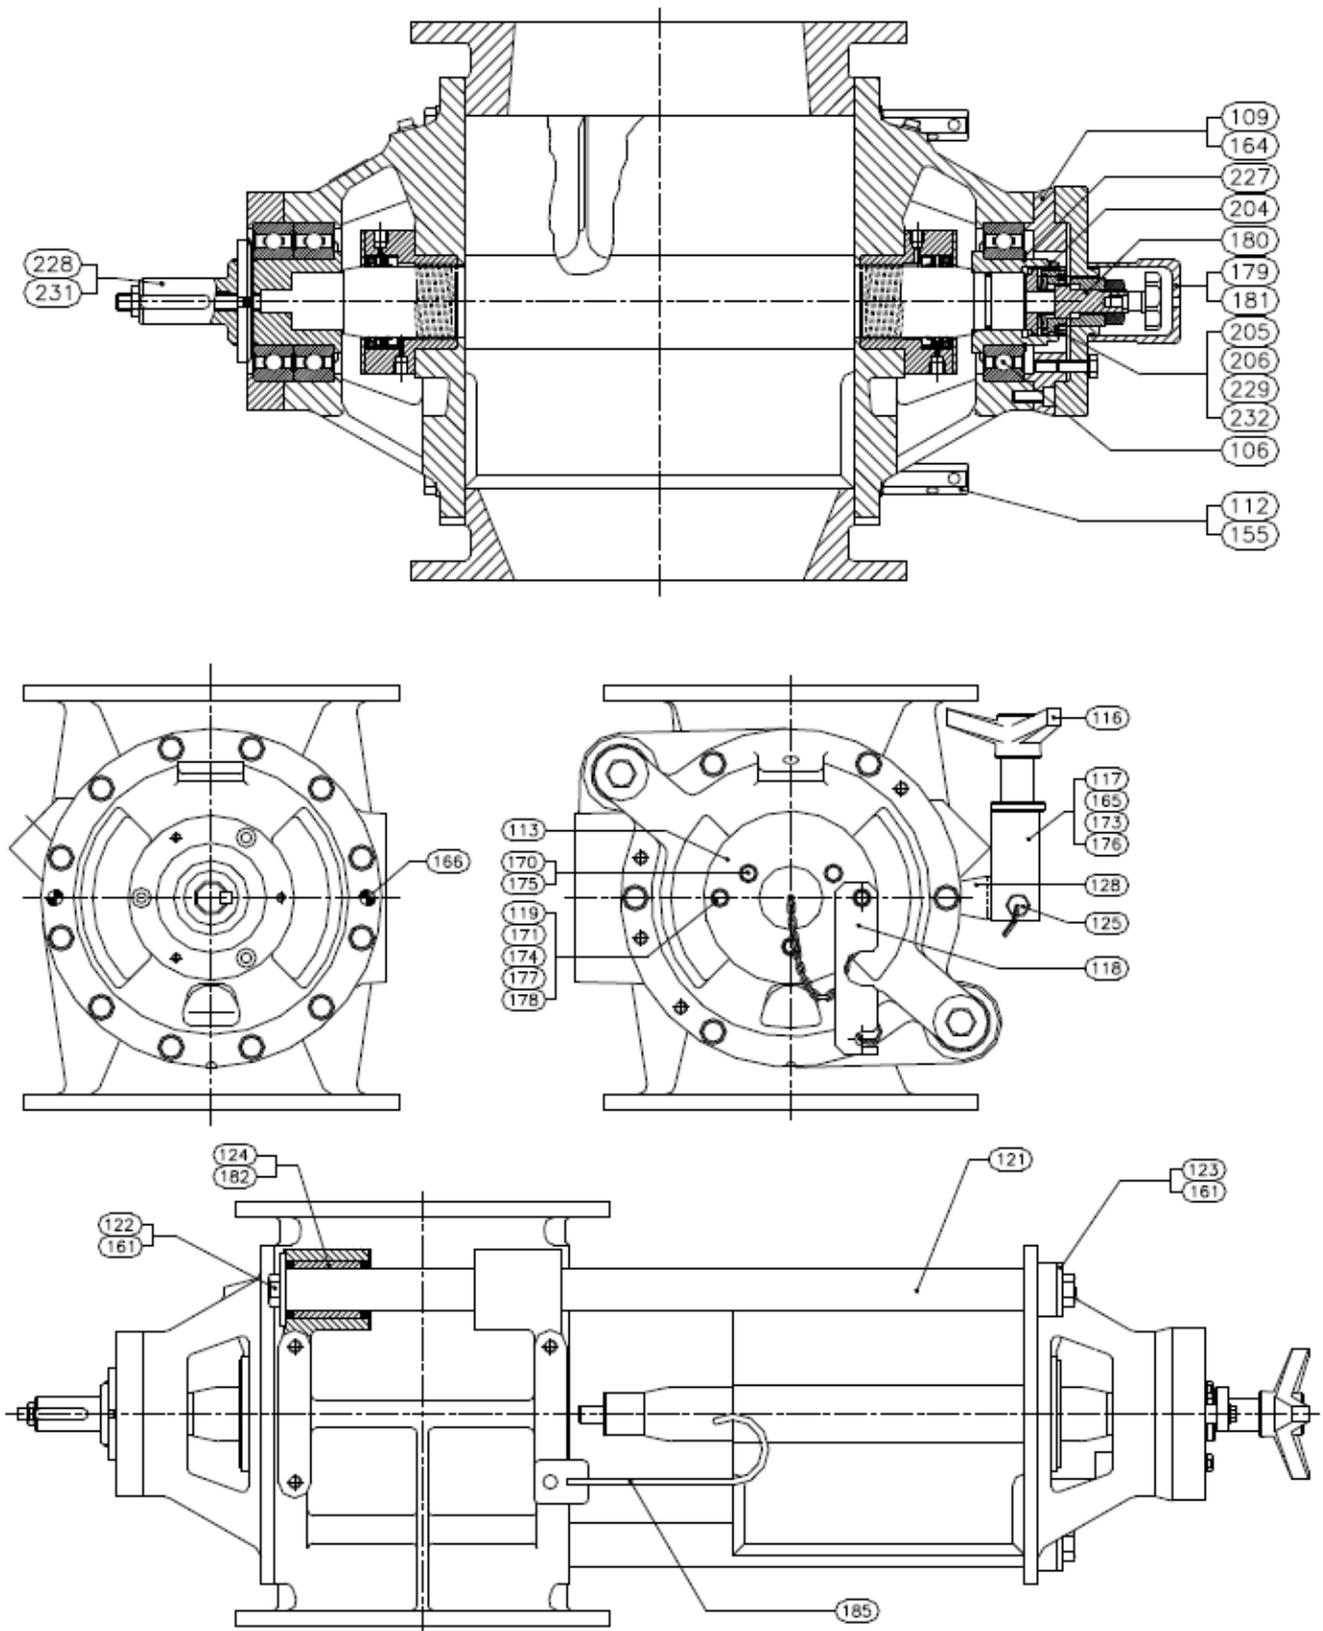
Drawing MZC parts (Dairy-EL I-MZC)
